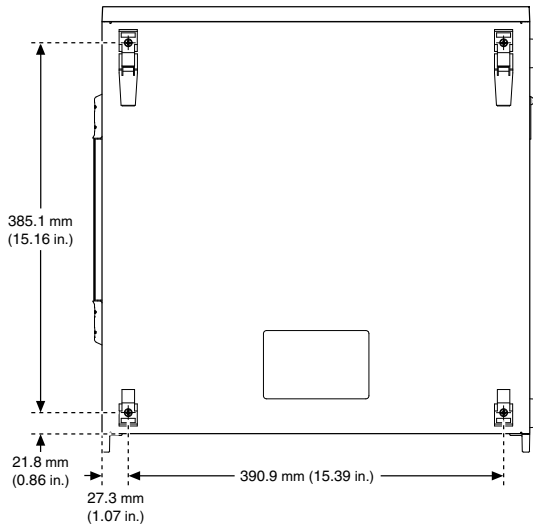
PXIe-1084 Chassis Dimensions (Bottom)
